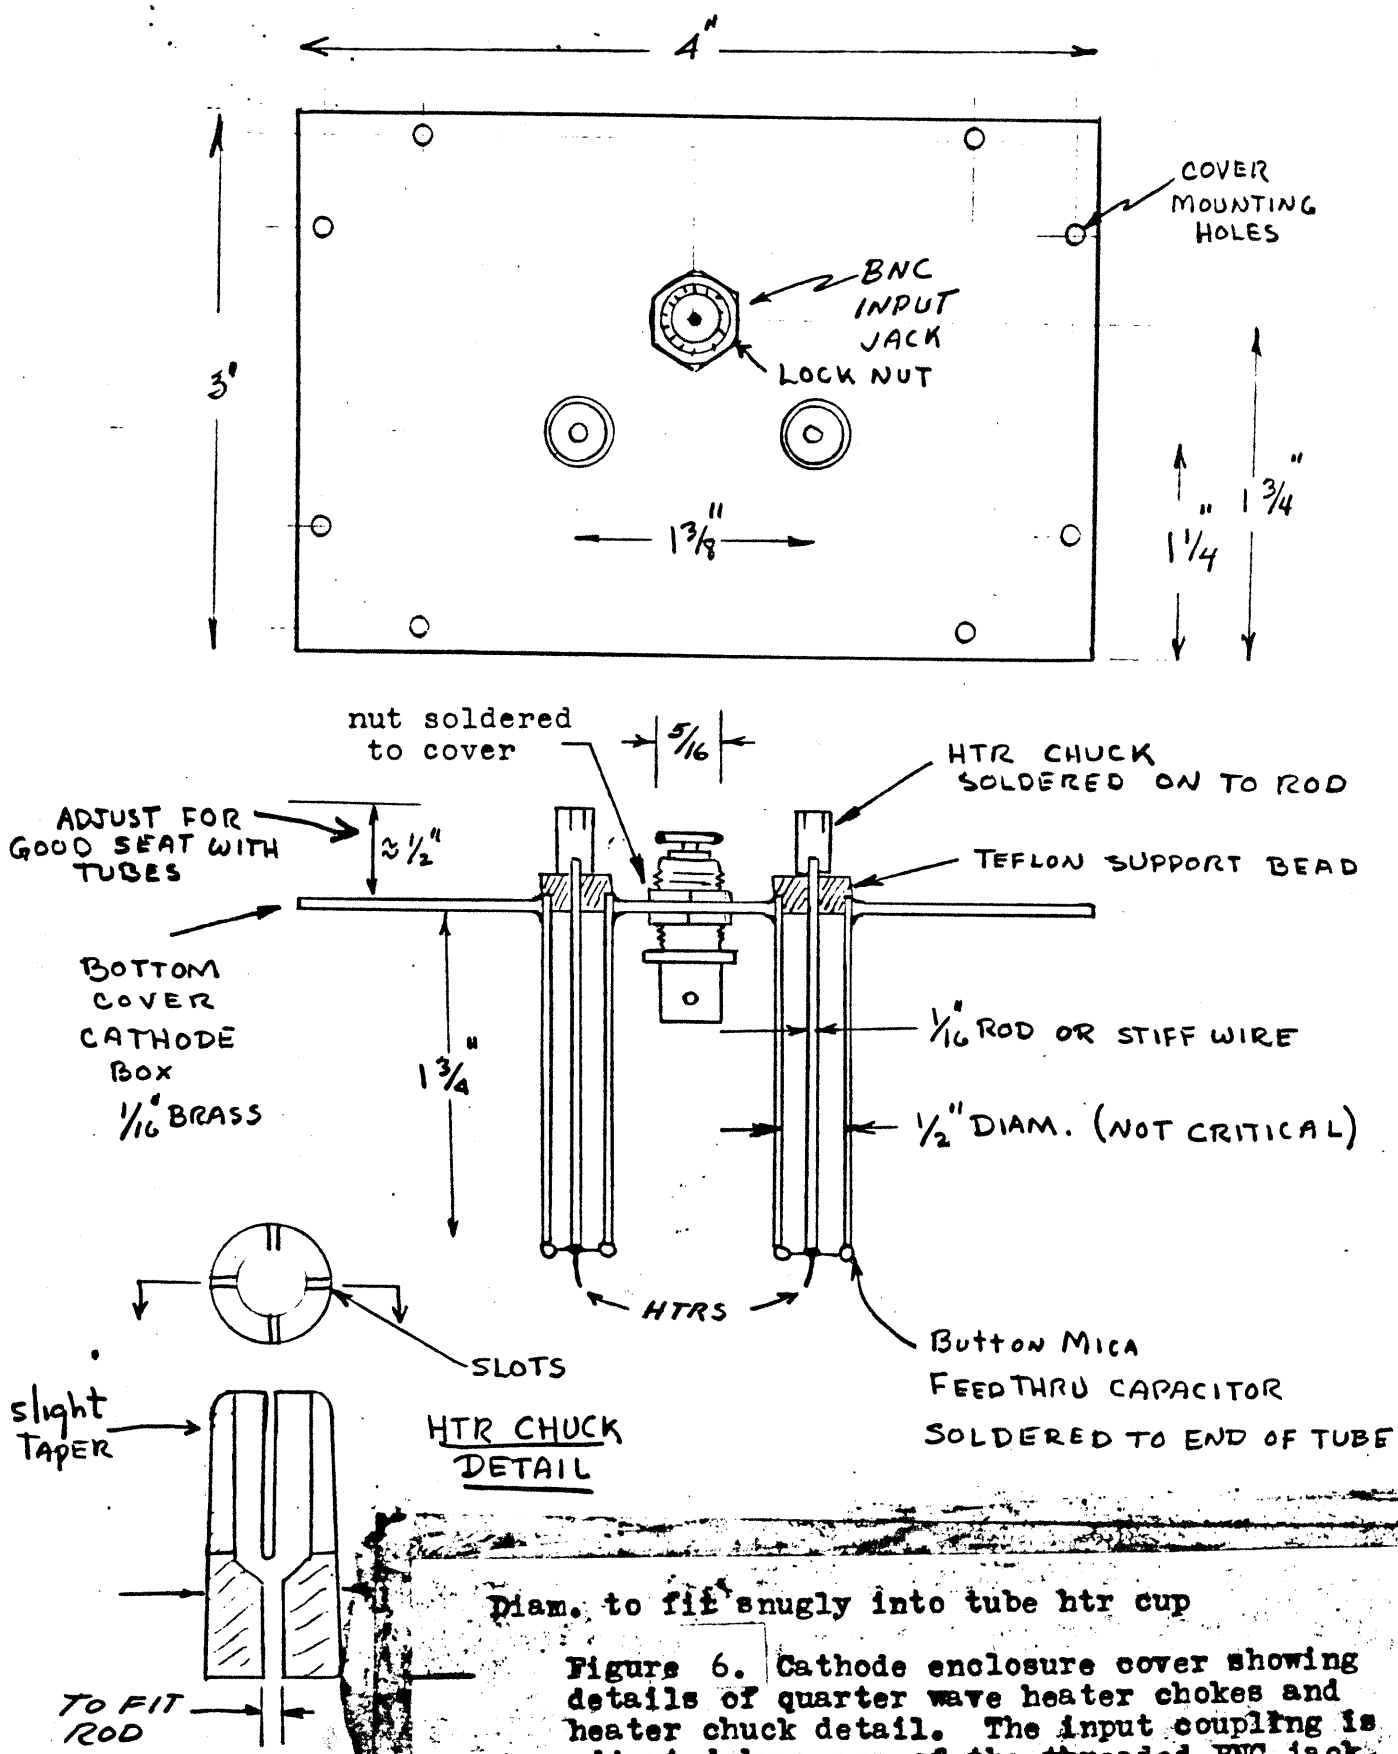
Cathode enclosure cover showing details of quarter wave heater chokes and heater chuck detail. The input coupling is adjusted by means of the threaded BNC jack. A lock nut is used on the outside and a similar nut may be soldered to the inside of the cover plate, or the plate may be tapped 3/8-32.
